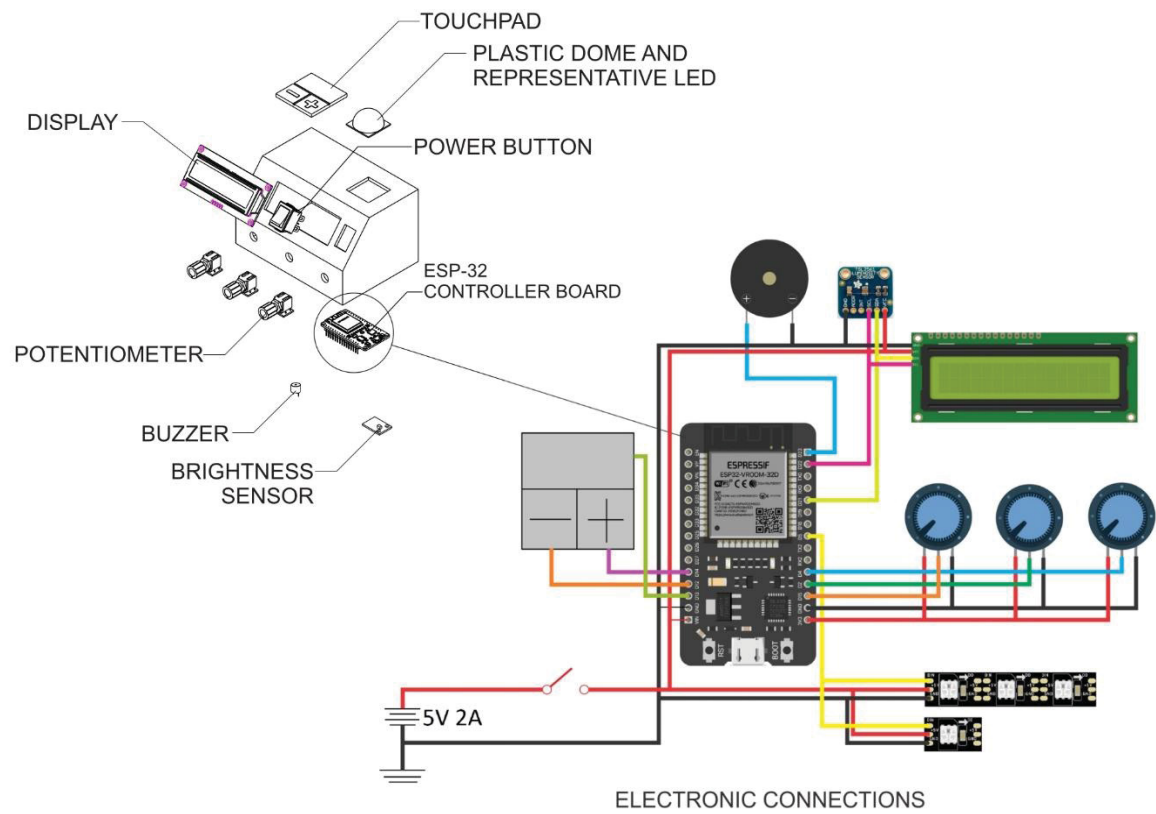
The control unit construction and electronic installation instructions. Zoomed-in view drawing of exploded control unit and detailed scheme of electronic connections at ESP32 controller board ports with connections and components used in the prototype.
